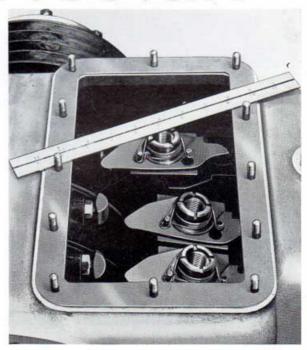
CHECKING MOVEMENT OF ADJUSTER NUT.
